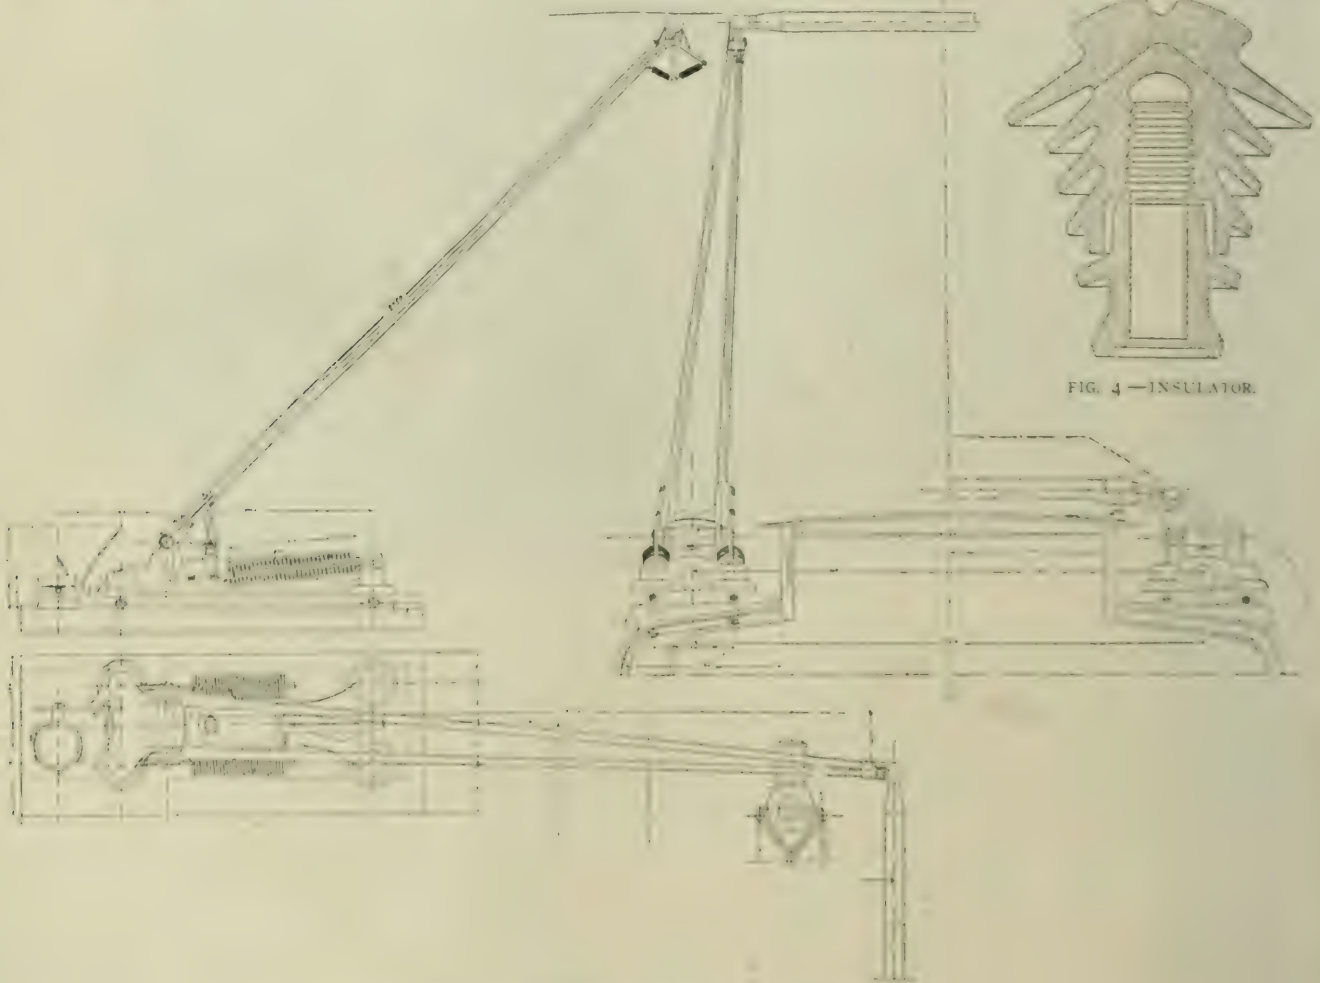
ELEVATIONS AND PLAN OF TROLLEY.
